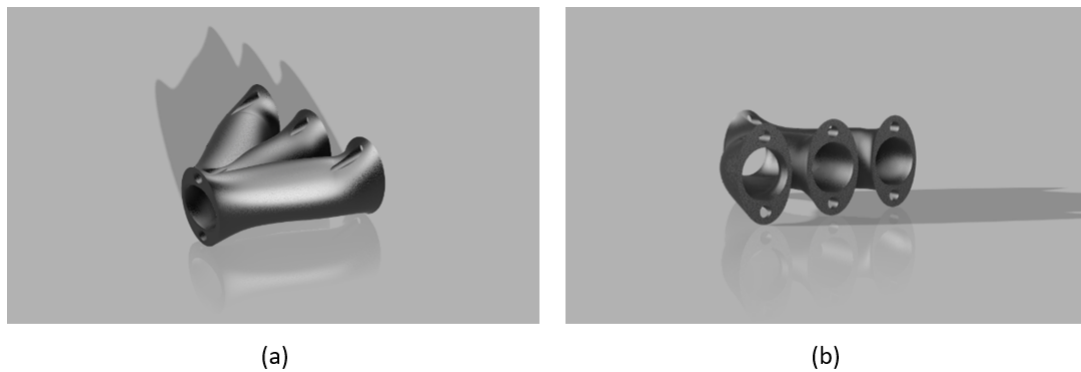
Manifold Design 3 (a) Outer Supports (b) Inner Supports
